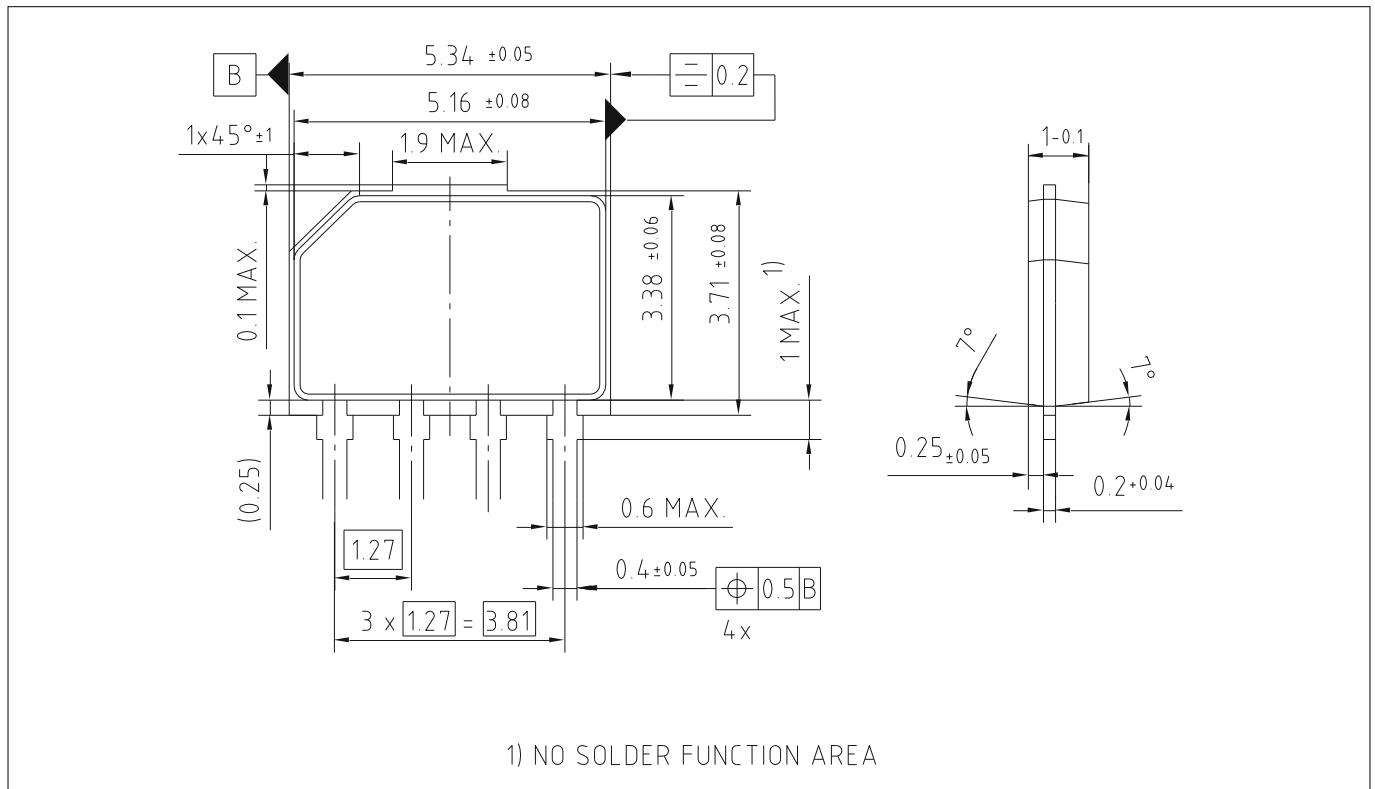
PG-SSO-4-1 (Plastic Green Single Slim Outline), Package Dimensions
